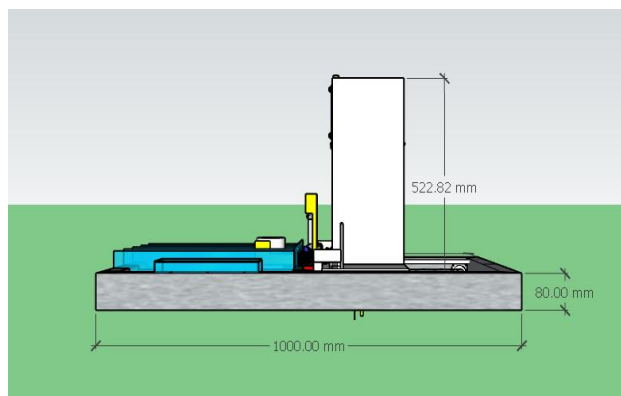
Propose Technical Drawing for the Machine's Design. (Side View)
